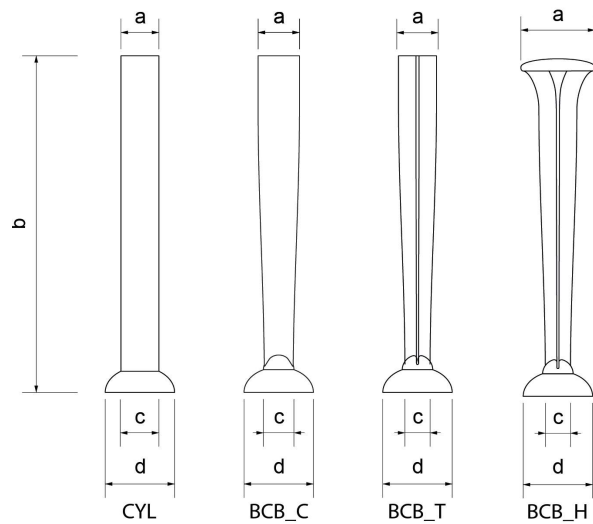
Model prototypes: technical drawing indicating (a) upper width, (b) height, (c) lower width, and (d) base diameter. Corresponding dimensions are provided in Table 1.
